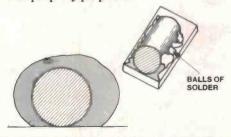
Tarnished surfaces prevent wetting altogether. Balls of solder sit on the surface.
